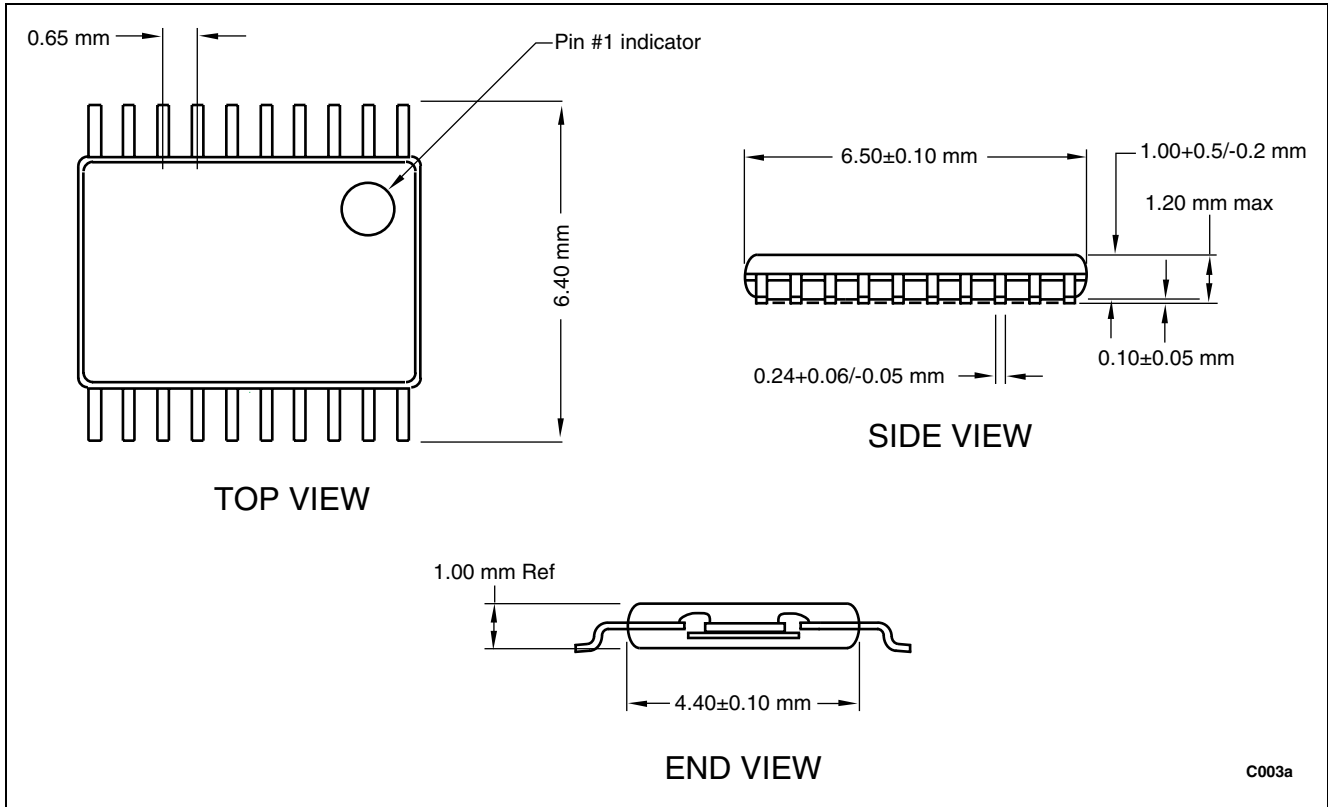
RF142 Package Dimensions – 20-Pin TSSOP
